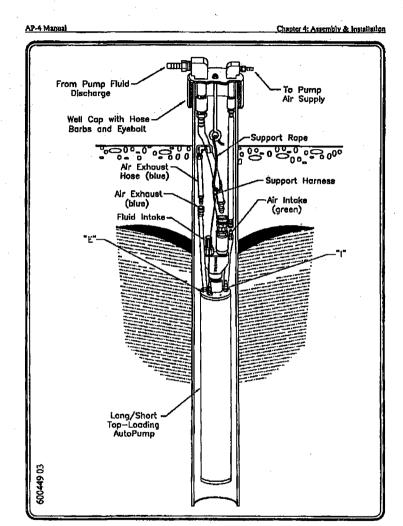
AP-4 Assembly: Well Cap with Hose Barbs
